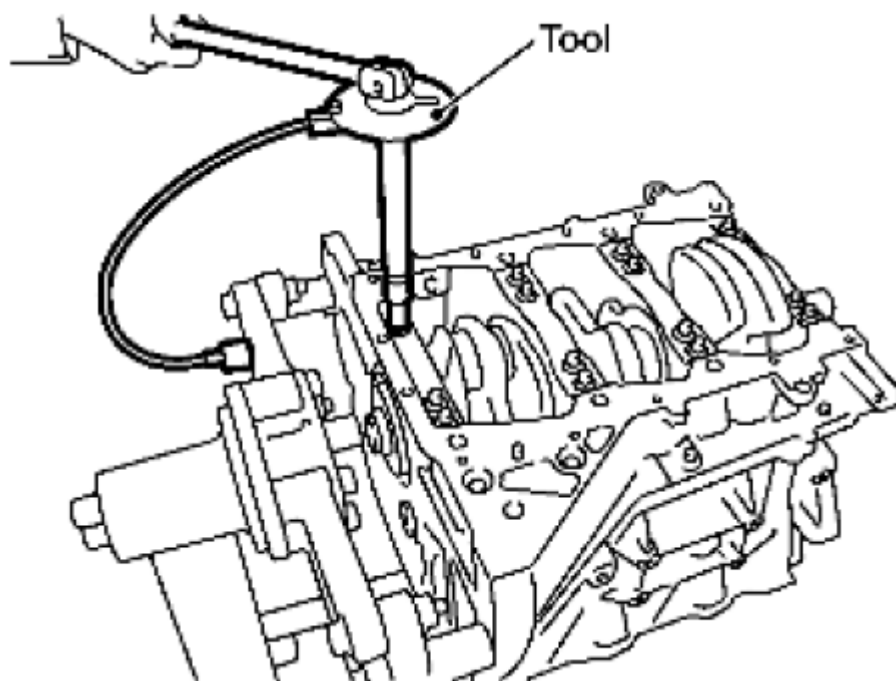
Identifying Lower Cylinder Block Bolts Tighten Sequence
